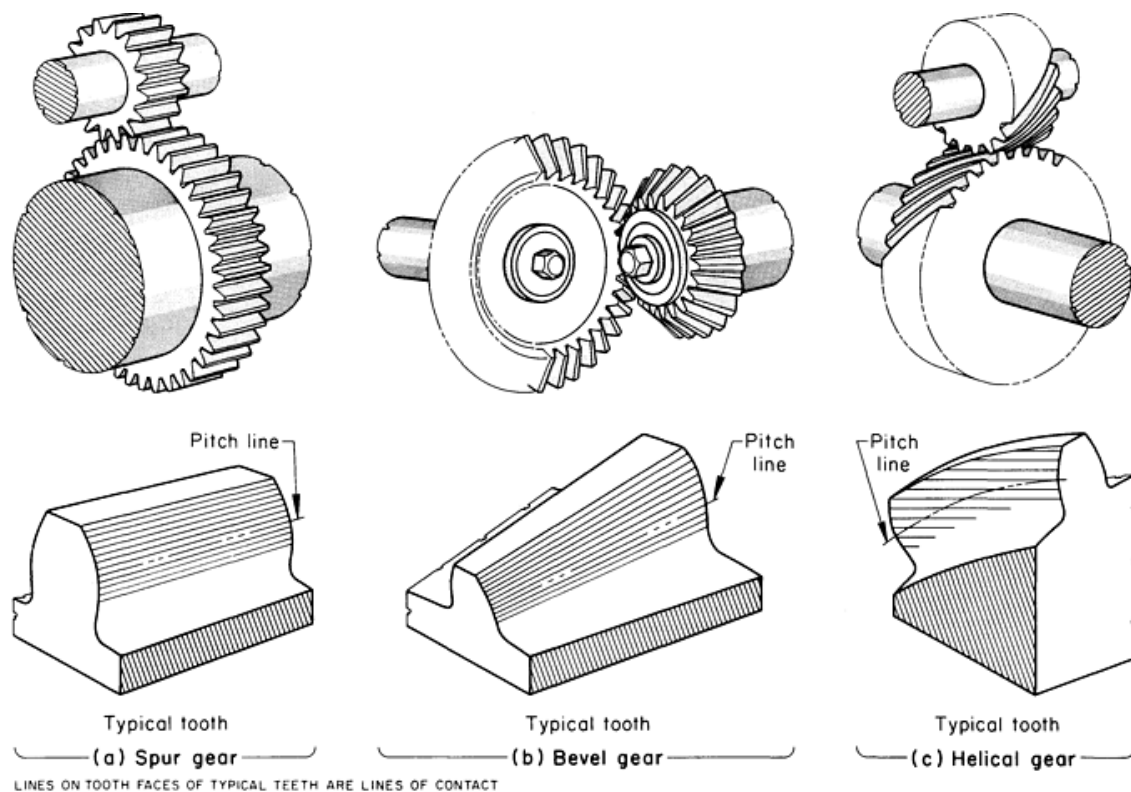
Tooth contact lines on a spur gear (a), a bevel gear (b), and helical gear(c). (Stokes, 1992)
